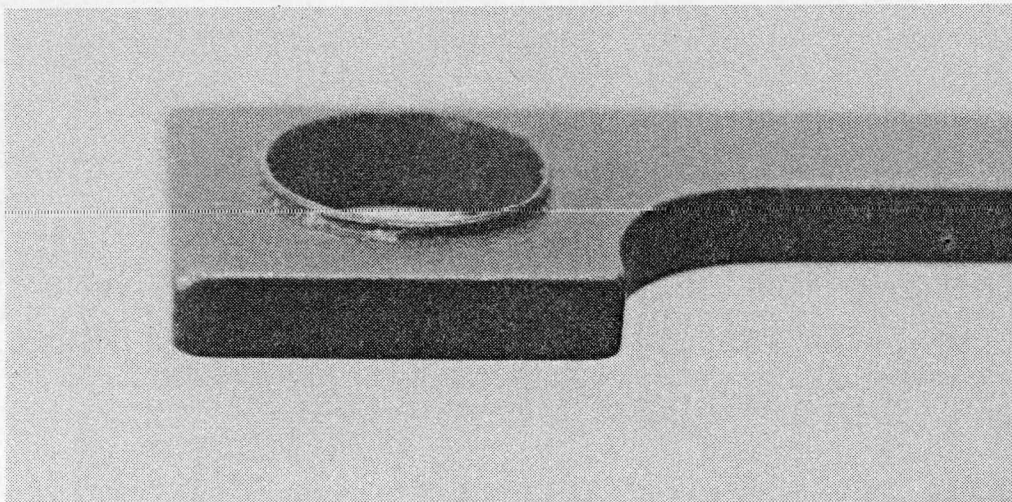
Extruded Burr Formed by Dull Drill in Beryllium-Copper
